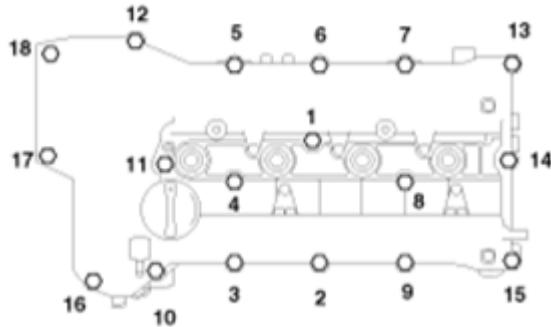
Cylinder Head Cover Bolts Tightening Sequence
